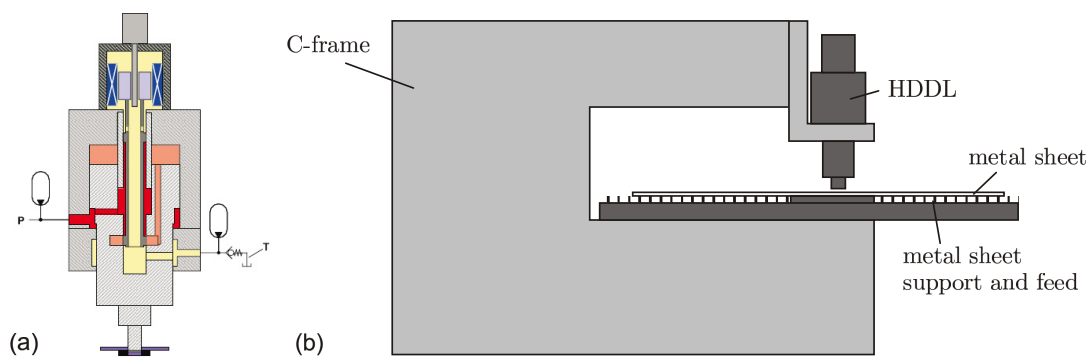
Hydraulic direct drive linear (HDDL) actuator
